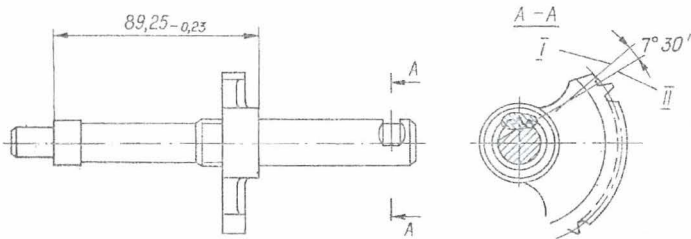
Fitting the quadrant of the starting mechanism shaft:
